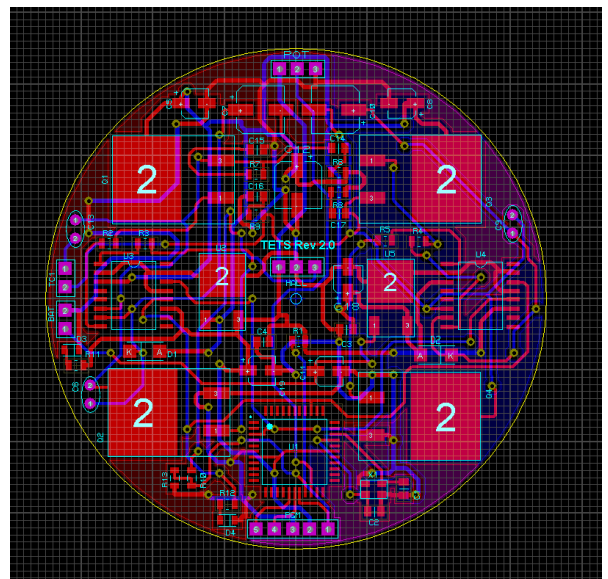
PCB Layout of the Primary Side Resonant Circuit
